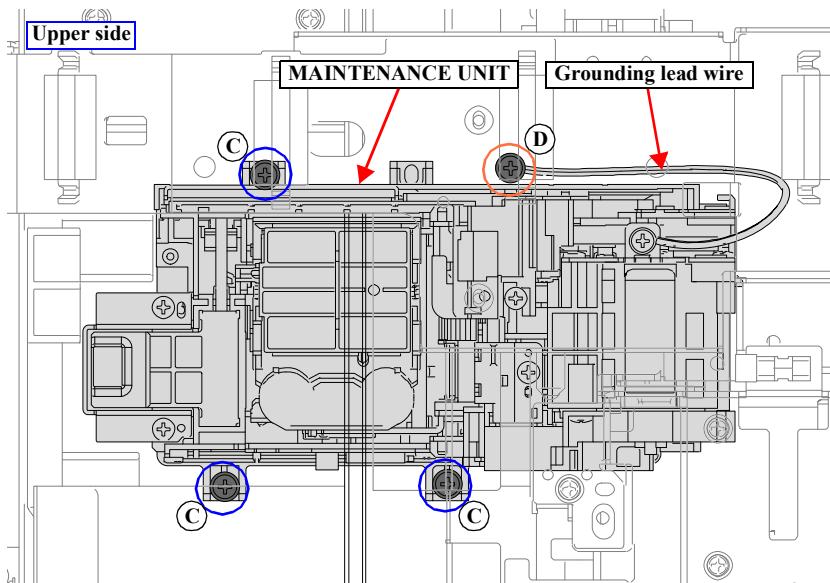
Removing the MAINTENANCE UNIT (7)
